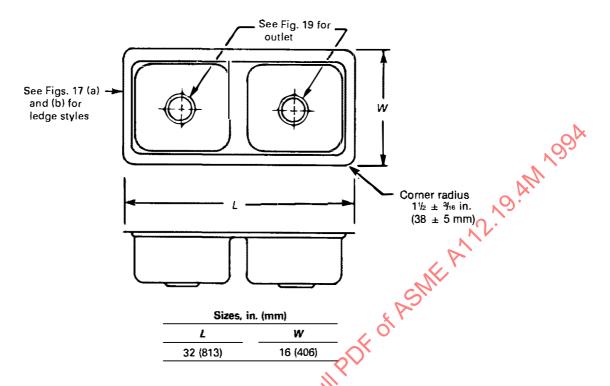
SELF-RIMMING AND FLAT-RIM KITCHEN SINKS, REVERSIBLE
